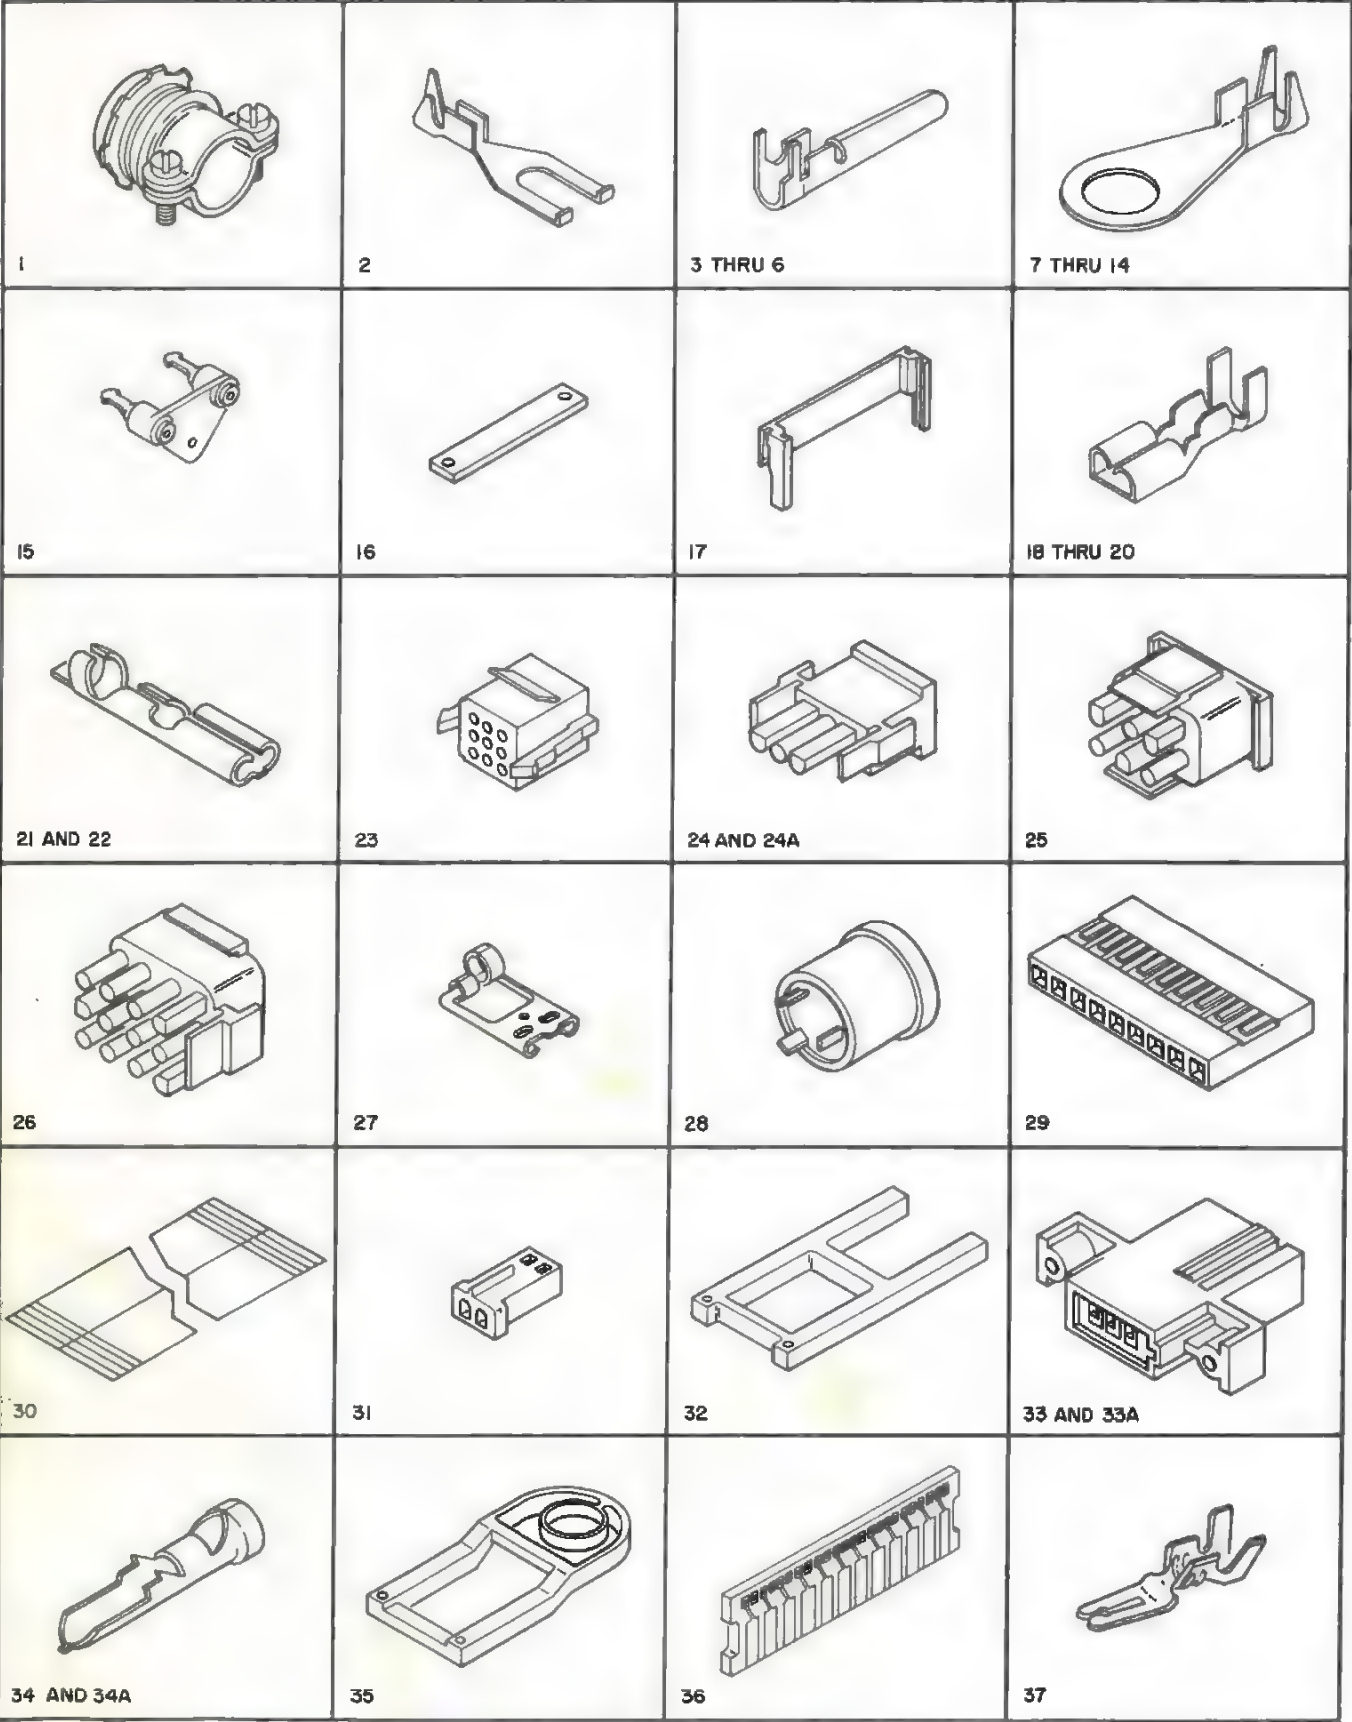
CABLE AND JUMPER ASSEMBLY COMPONENT PARTS. SHEET. 1 OF 3. INDEX NOS. 1-37. SEE LIST 12.
